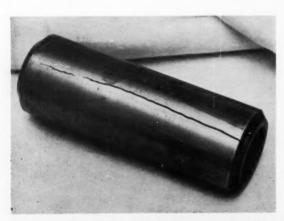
Magnaflux inspection of finished wrist pin shows large crack which opened in heat treat, due to a non-metallic inclusion. The wasted finished machining and heat treating here, could have been saved if the inclusion had been detected by inspection before heat treat.
